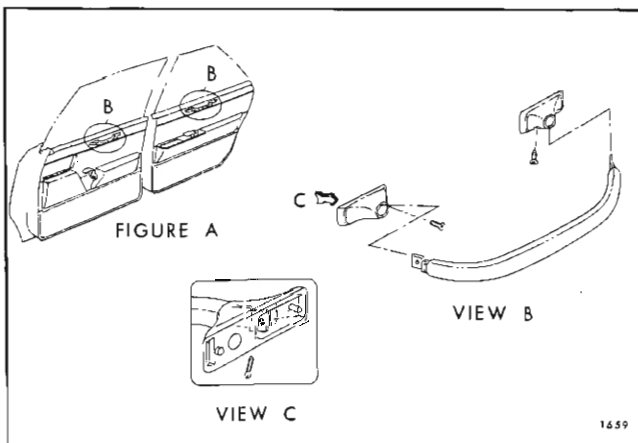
D8—Door Pull Handle Installation - 68000 Series
